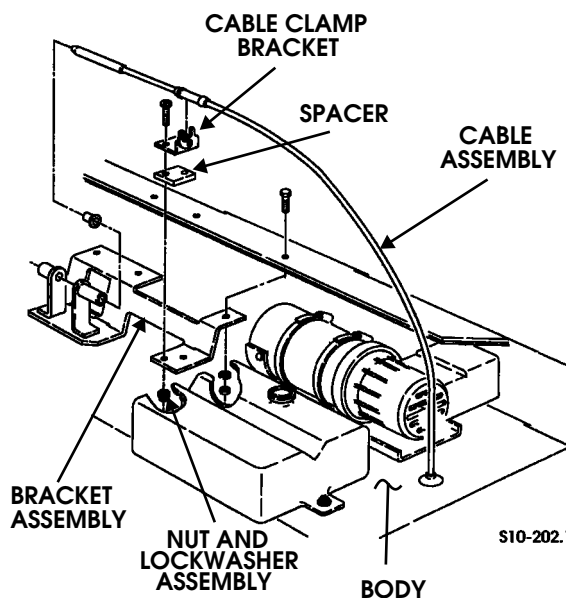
Cable Clamp Bracket Assembly Breakdown
